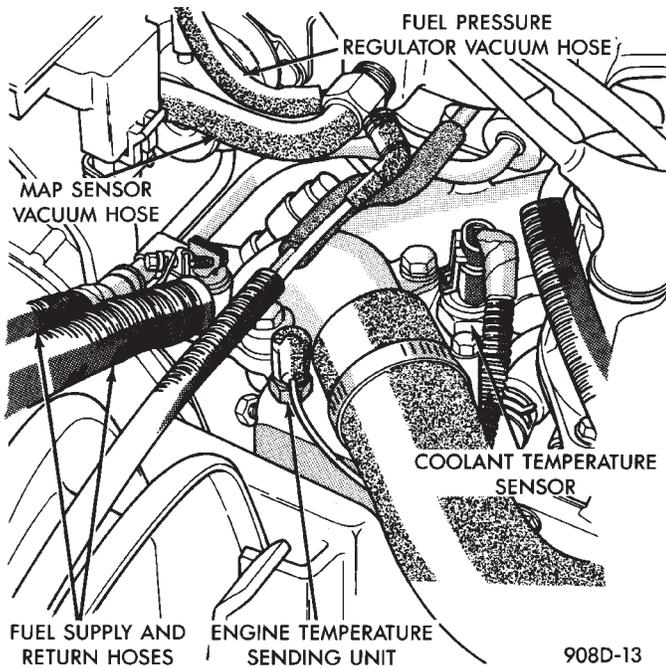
Coolant Temperature Sensor—3.0L Engine
